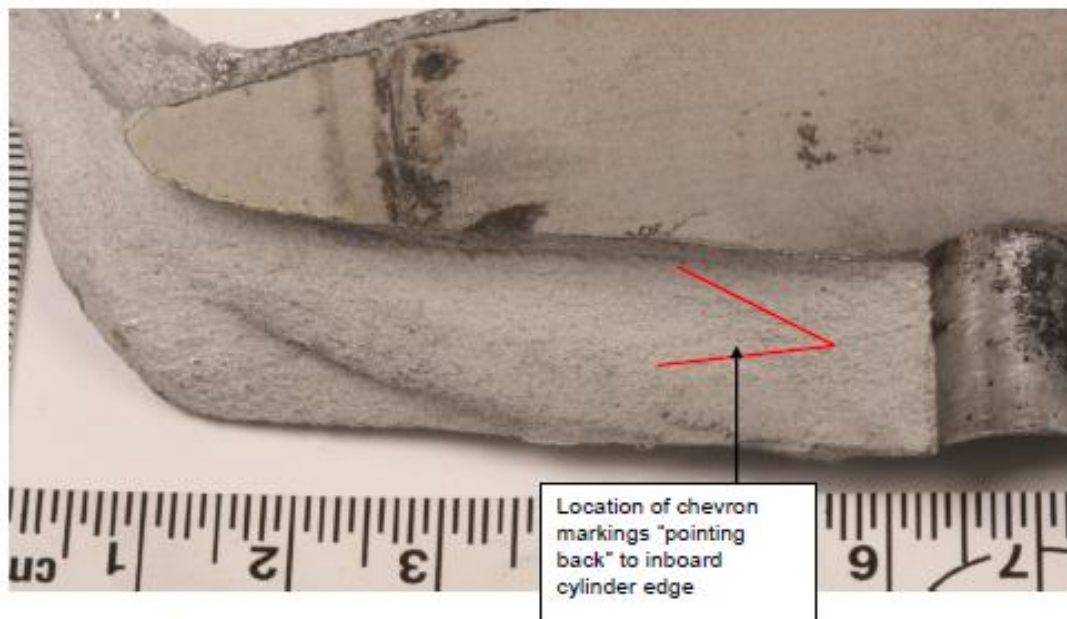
Showing the detail of fracture surface 'B1'.
